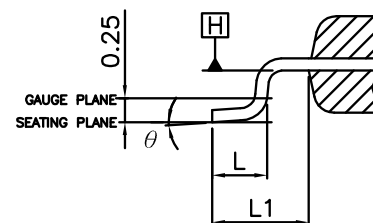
ES9039MSPRO/ES9039SPRO 64 eTQFP Package Dimensions
